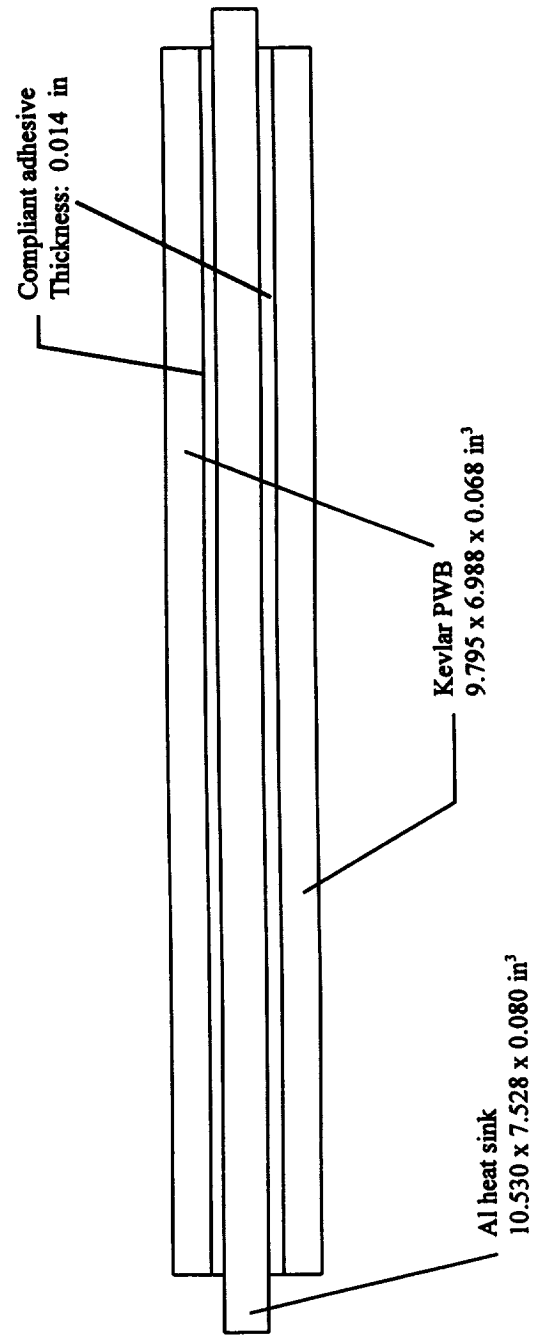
Side-view of the baseline PWB assembly with Al heat sink (not to scale).
